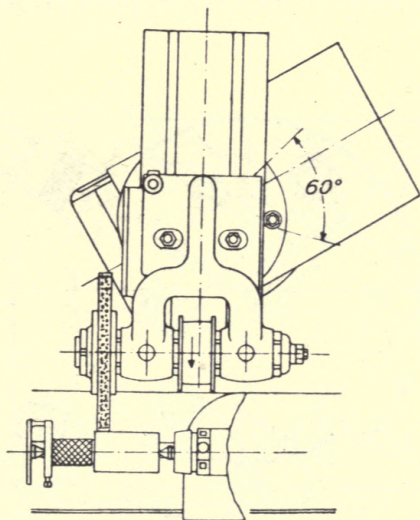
SETTING OF WHEEL SLIDE TO OBTAIN EXTRA FINE FEED FOR GAUGES, ETC.
